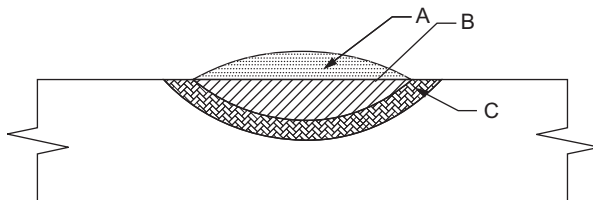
Dilution of material and heat in the weld nugget.
